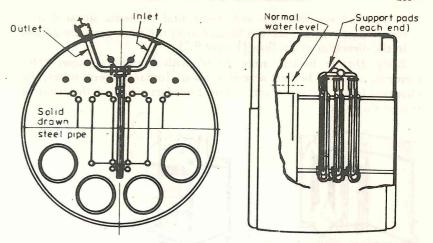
Coil-type desuperheater used in connection with Scotch or Howden-Johnson boilers
